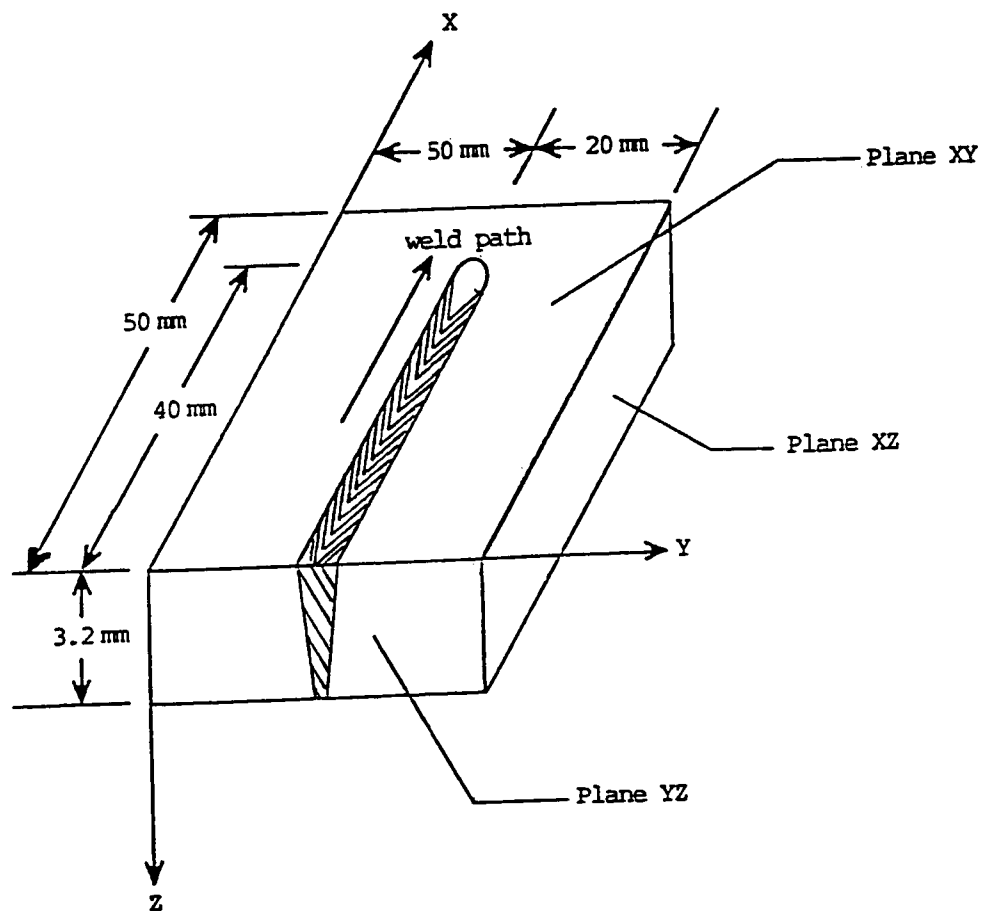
Spatial orientation of welded parts showing part dimensions.
